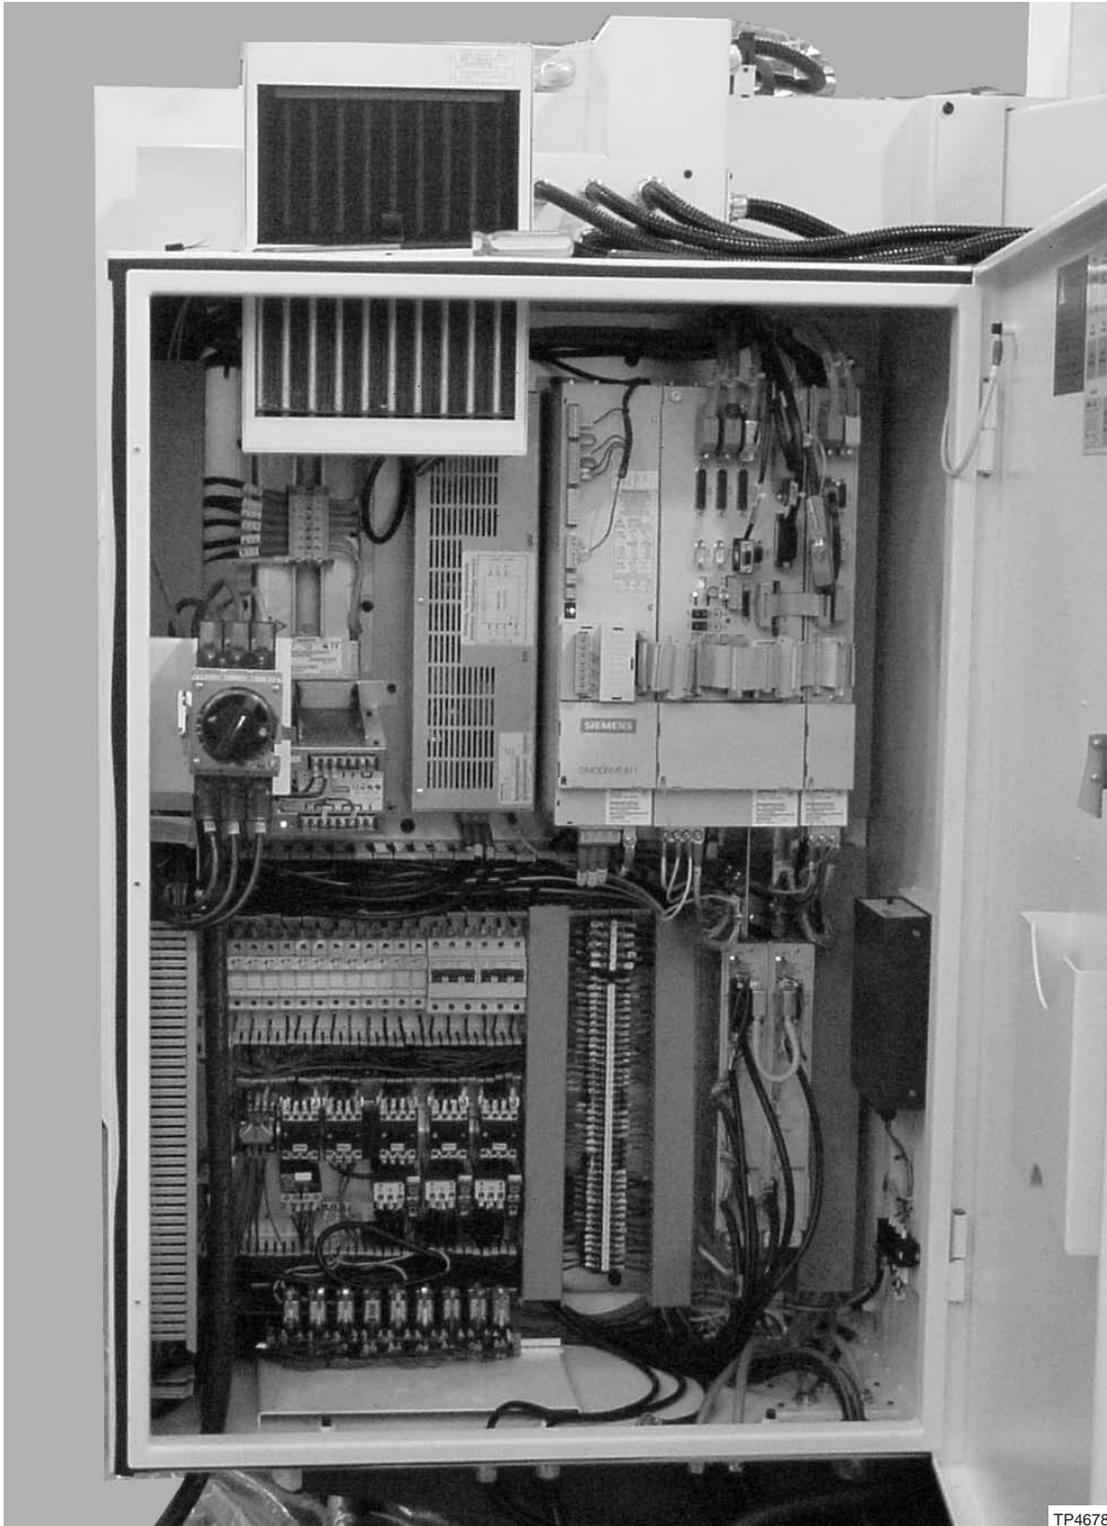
Outside Power Case Door and Heat Exchanger on Standard Machines
